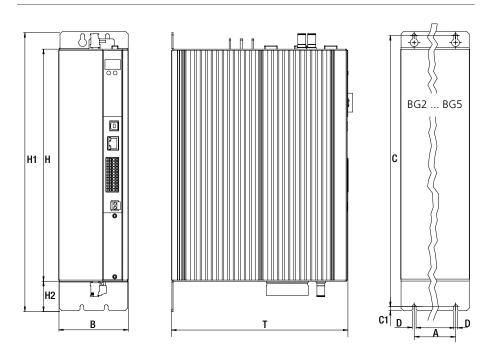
Dimensional drawing, housing with air cooling, schematic depiction for BG2 - BG5
